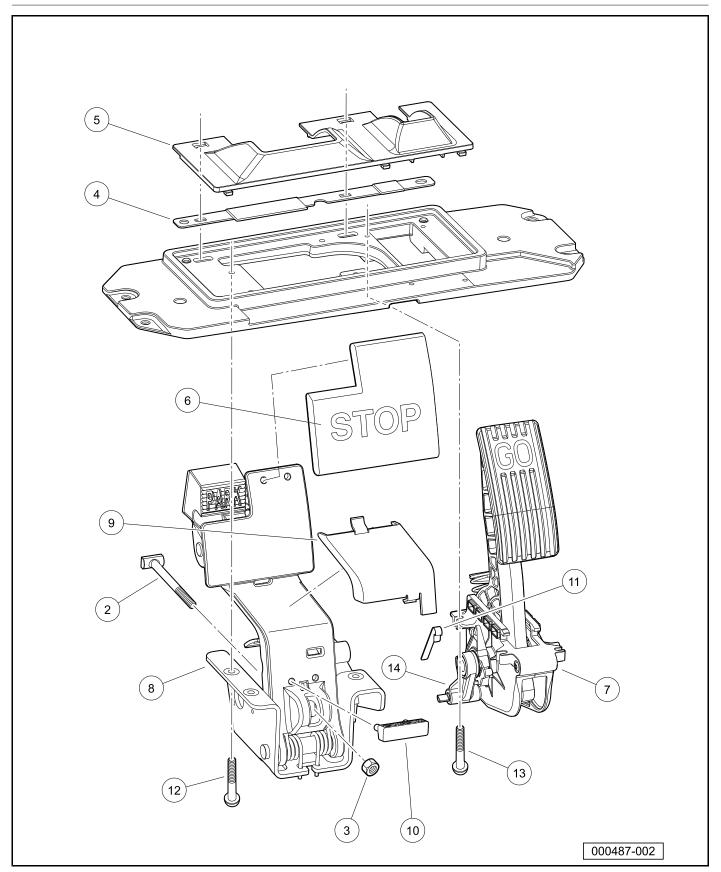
Accelerator Pedal Assembly and Brake Pedal Assembly
